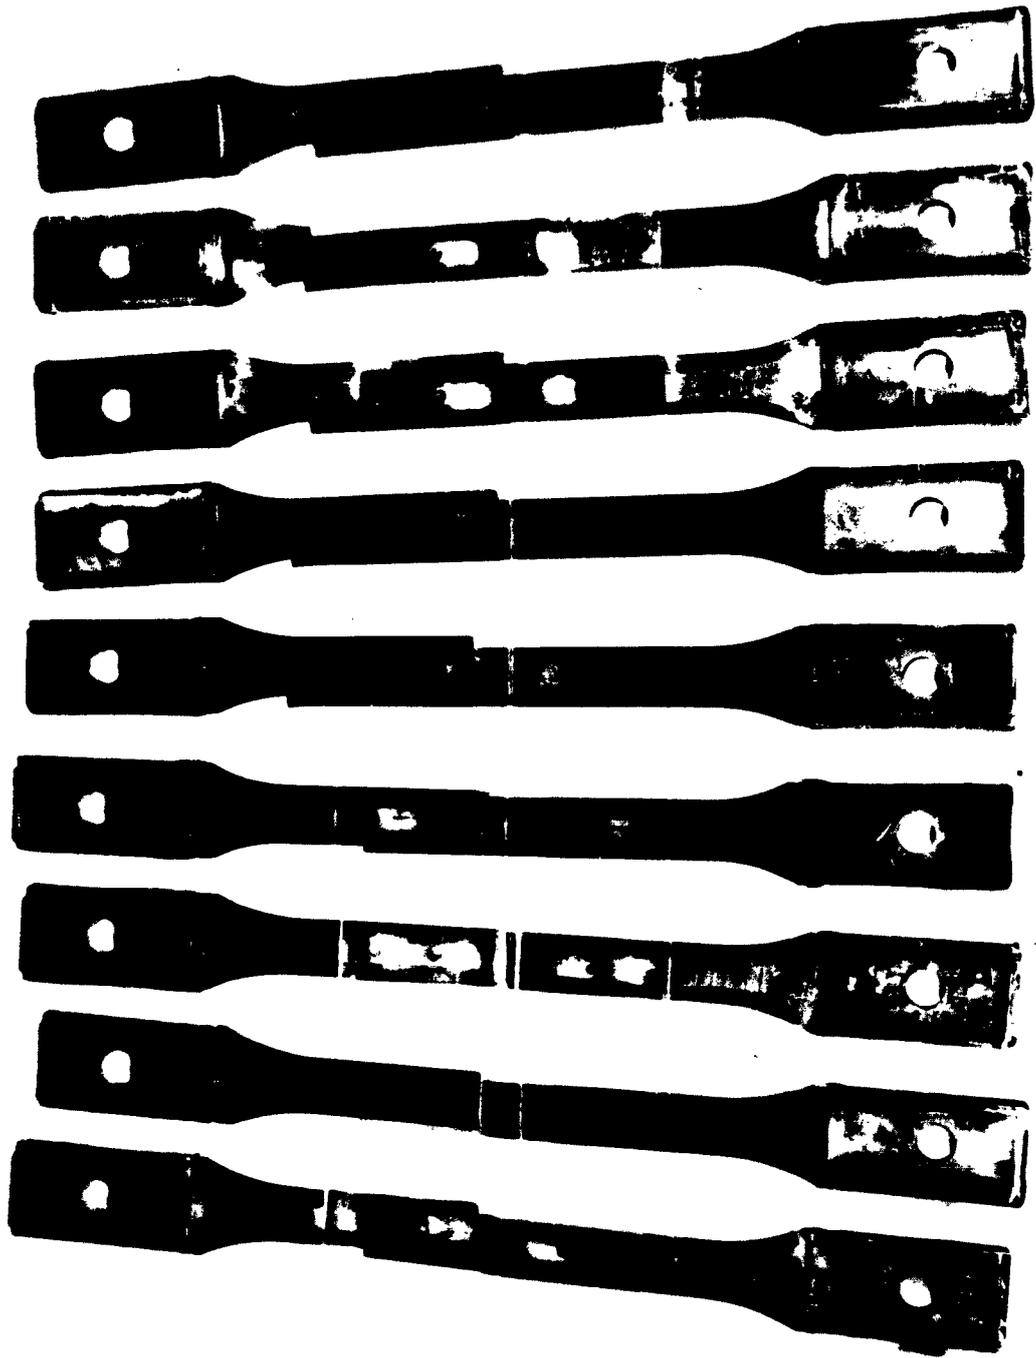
includes photographs of the AM 355-PH 15-7 Mo specimens after fracture. Location of the fracture with respect to weld patterns are illustrated.
